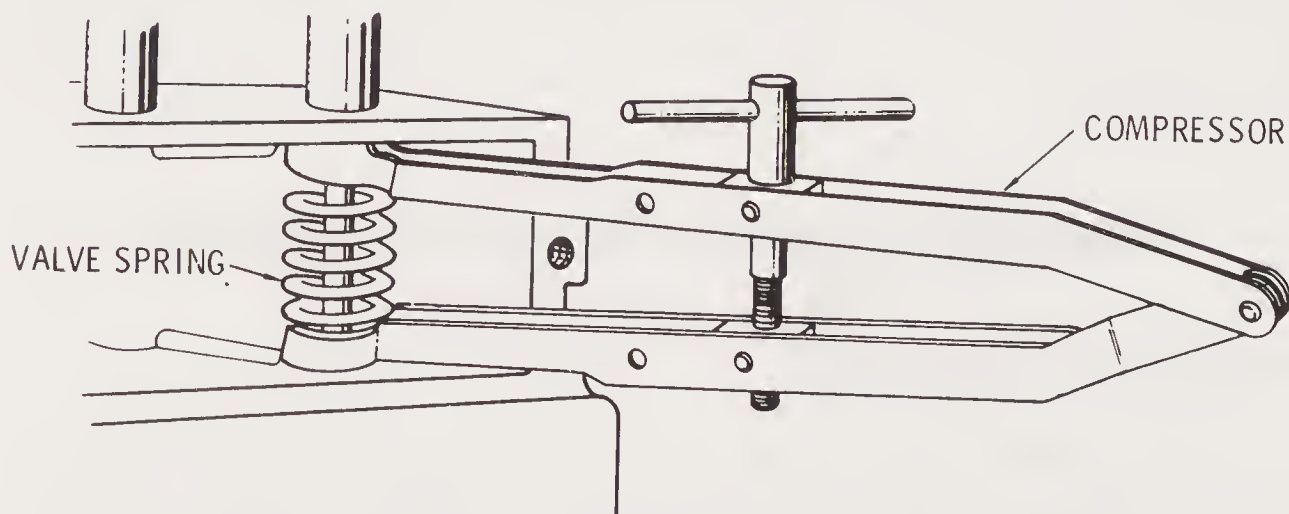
A typical valve spring compressor tool for flat-head-type engines, showing method of compressing the valve spring to permit removal of retainer.
